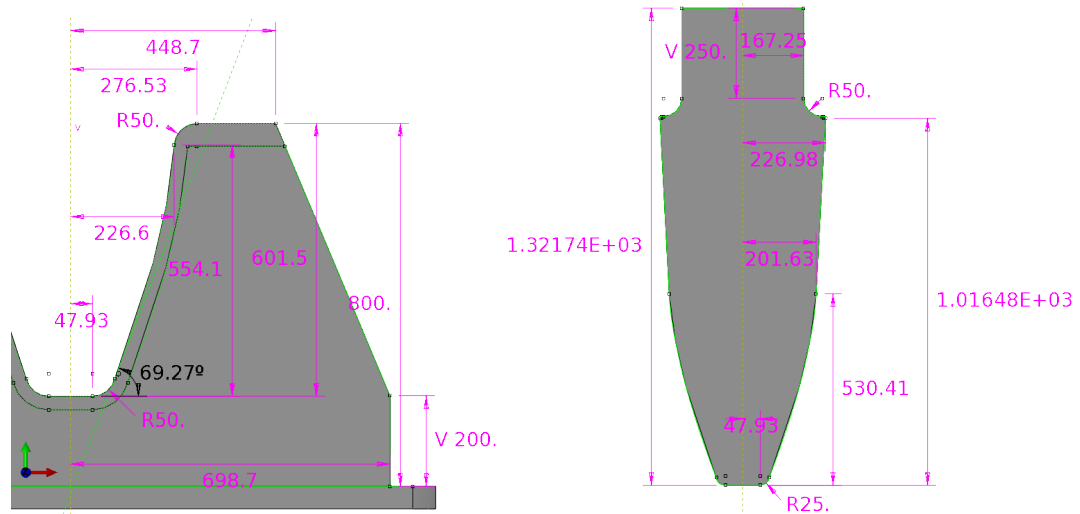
Die (left) and punch (right) dimensions in millimeters
